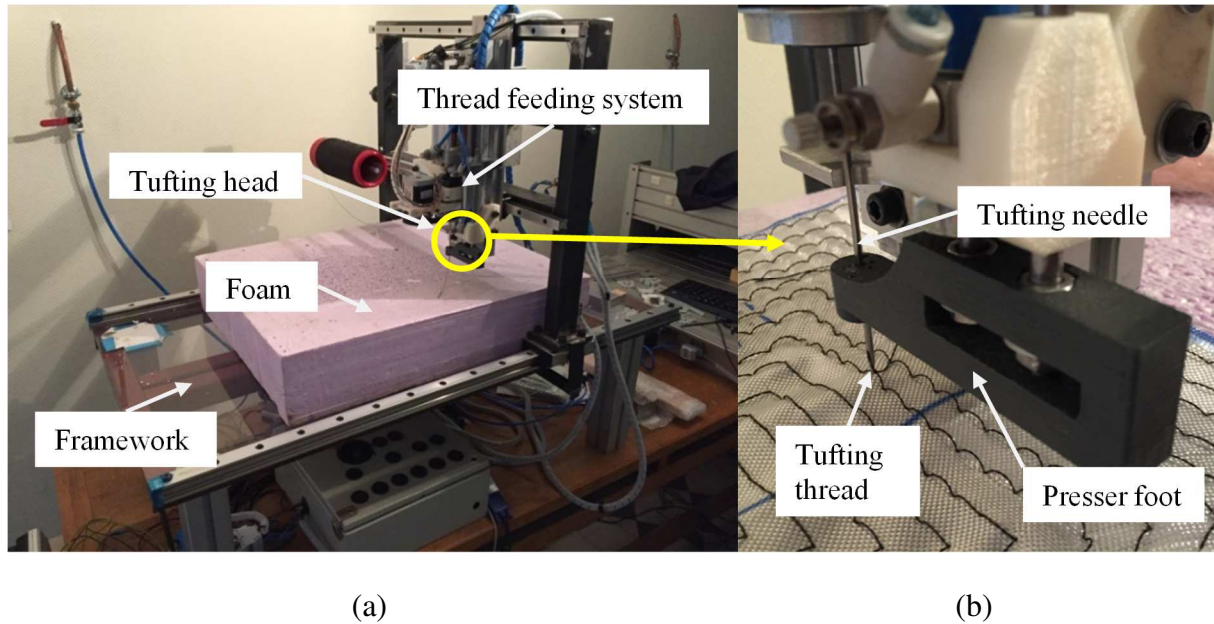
Tufting device (a) and zoom of tufting head (b).
